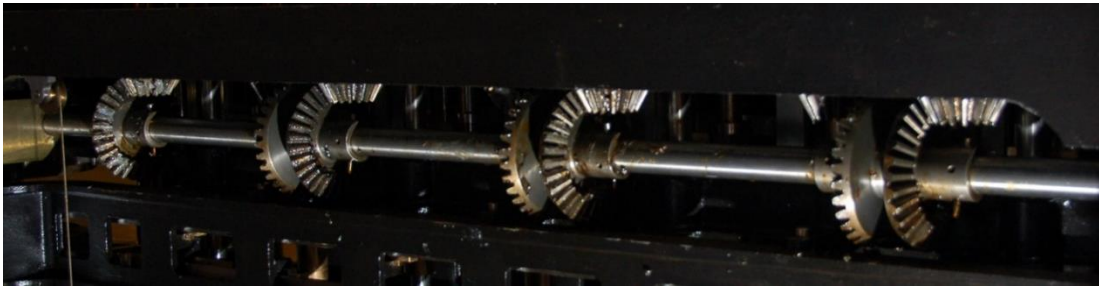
Circular motion bevel gear drive for mirrored carry axes.
